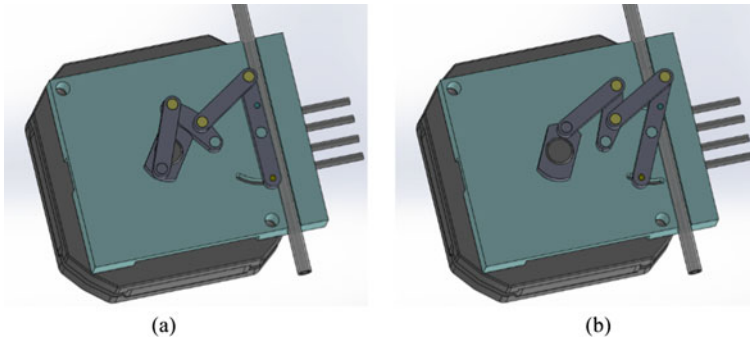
Clamp: preliminary CAD design, open (a) and closed (b) configurations
